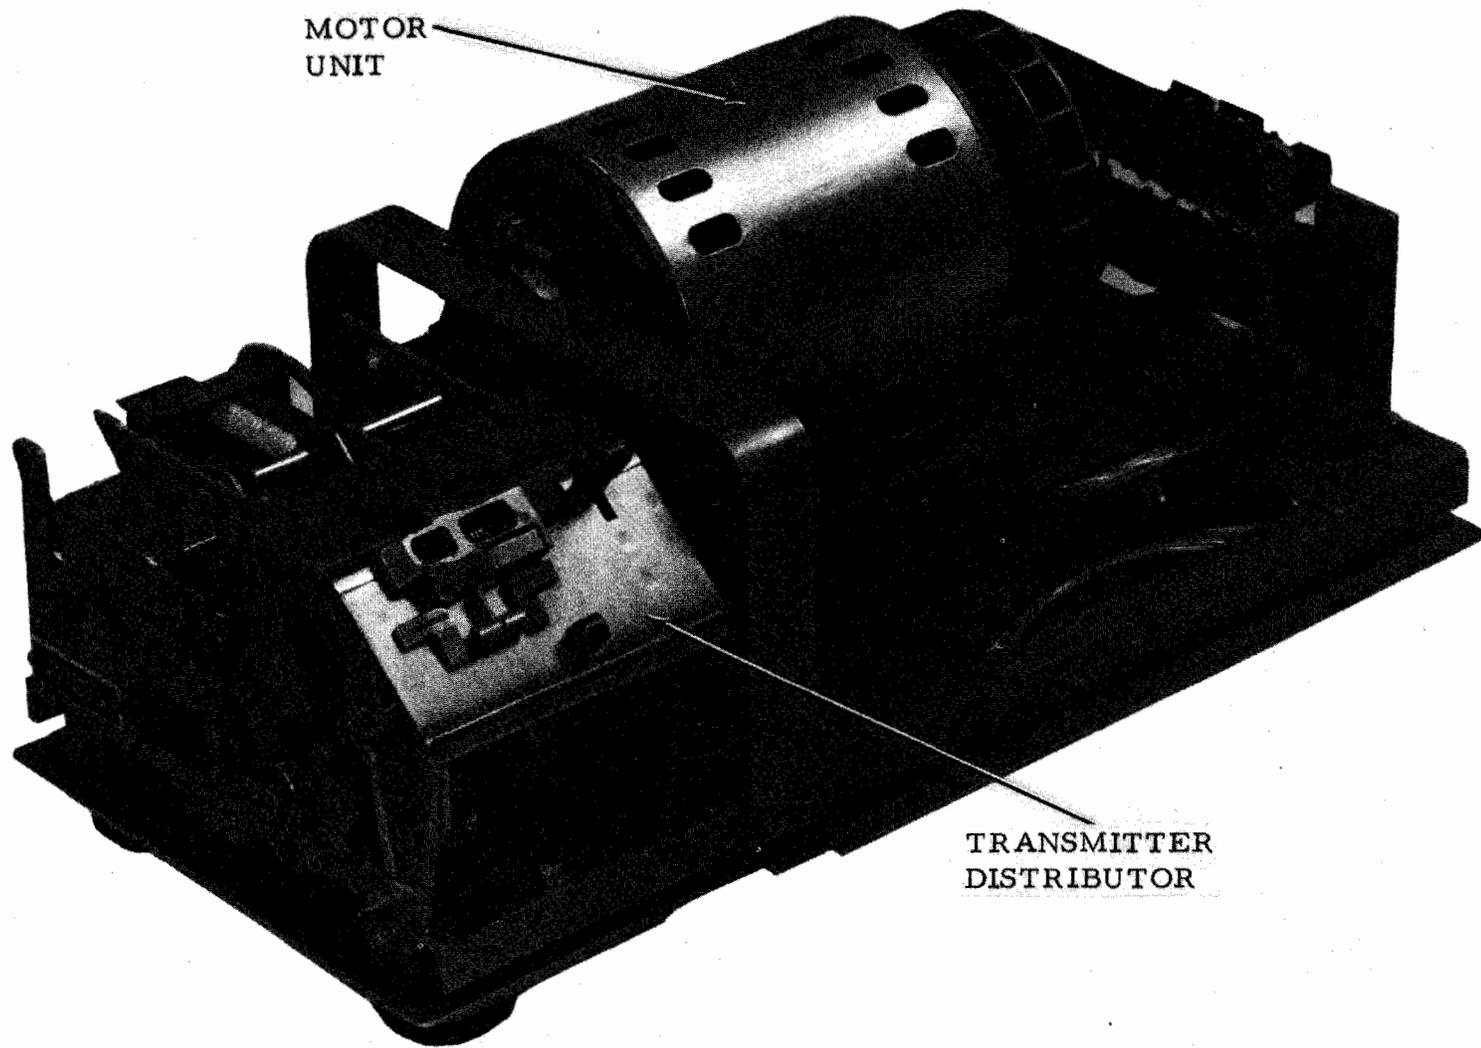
Transmitter Distributor Base - Single Contact, Single Mounting (Transmitter Distributor and Motor Unit in Place)
